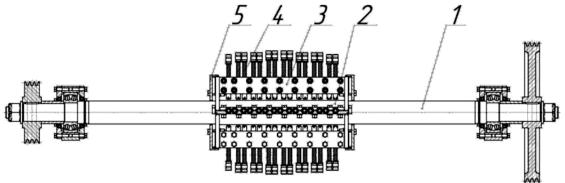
Cable rotor of mixer: (1) shaft; (2) drum; (3) removable blades; (4) cable elements; (5) lock
